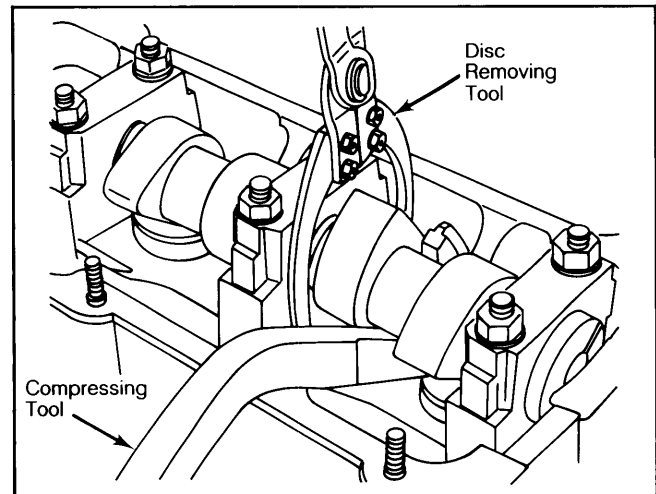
Positioning Cam Followers For Adjusting Disc Replacement
